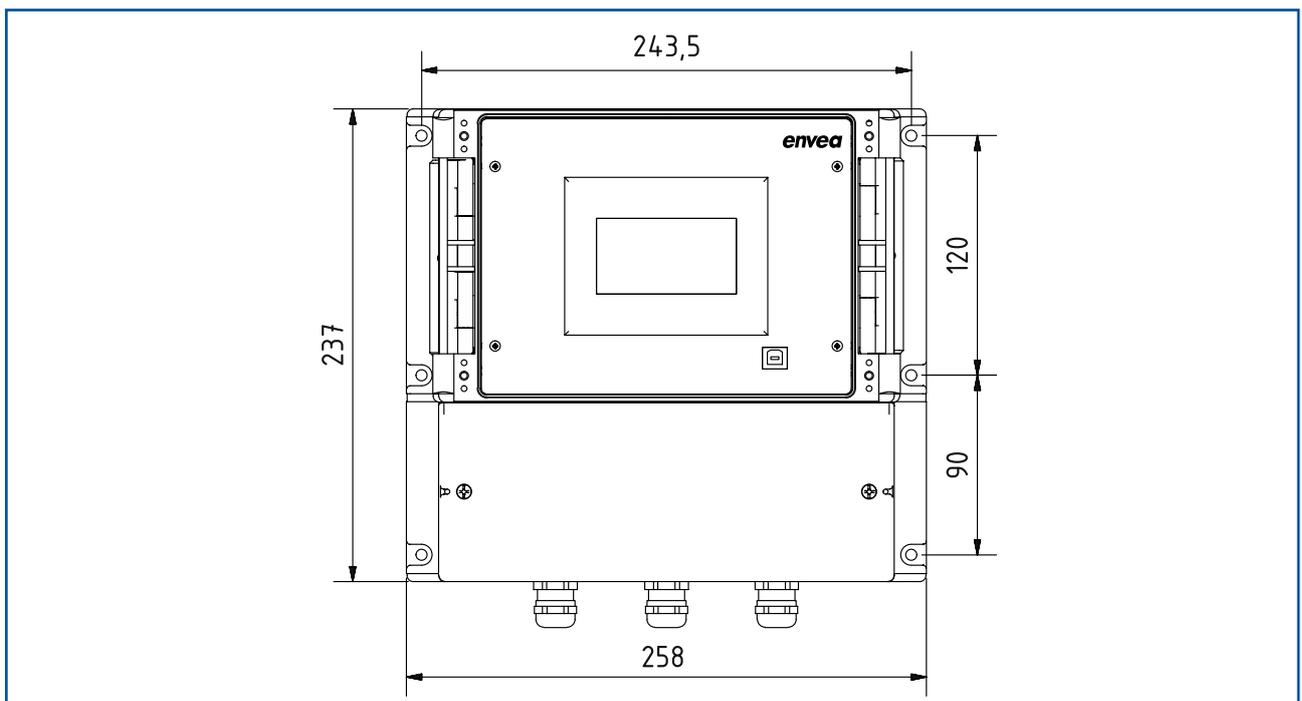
Dimensions of the MSE 300 in the field housing (front view)
